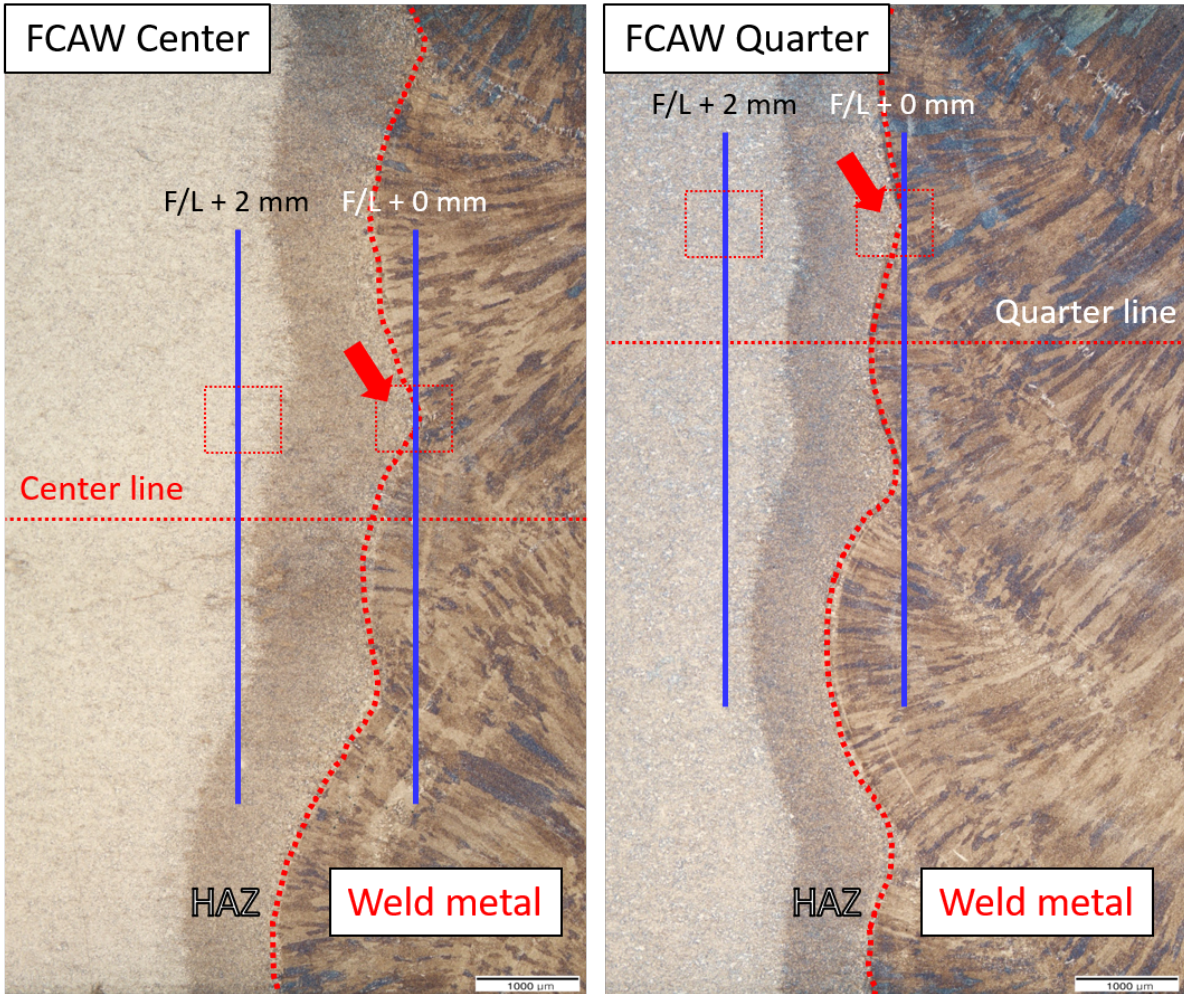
Macrograph of FCAW welding specimen at quarter thickness and center thickness
